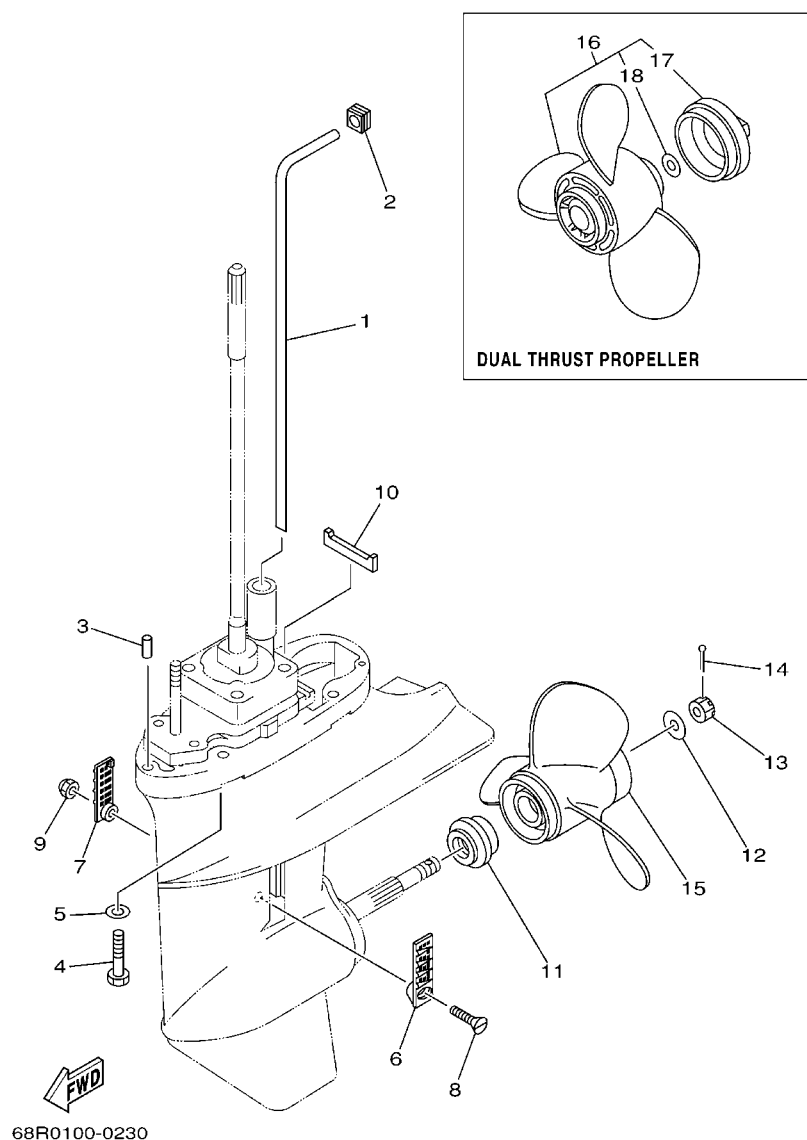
LOWER CASING & DRIVE 2 BOITIER D'HELICE TRANSMISSION2
